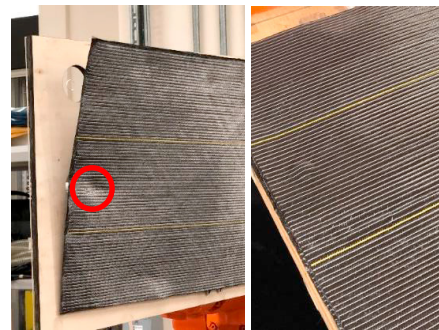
Traditional dry fibre preform in-situ with vacuum grips (left) and upon removal from vacuum grips (right)
